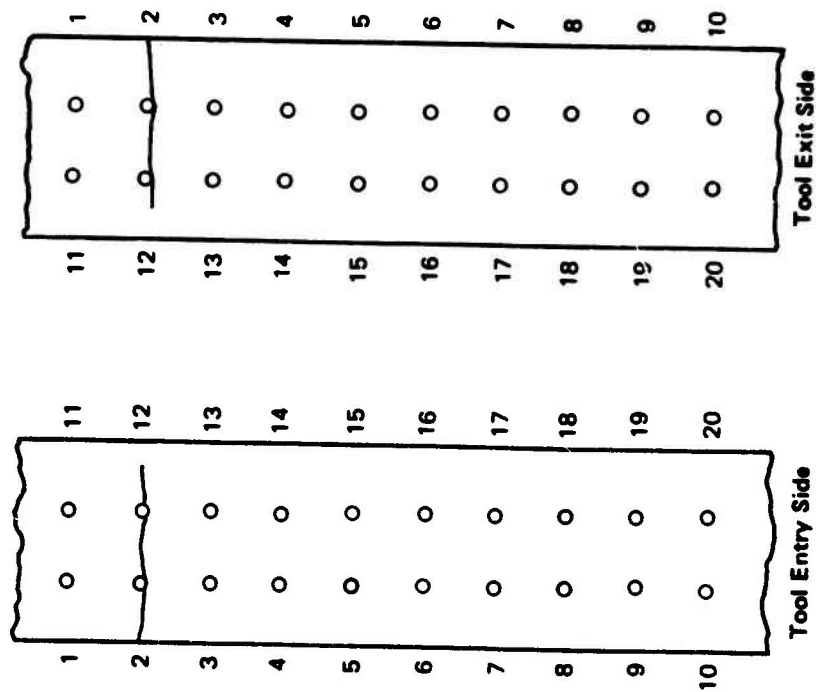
Fatigue Crack Initiation Sites in Usage Simulation Specimen No. 2A9 (Fig. 2, Load Transfer, Type I) Detected During Testing and After Disassembly
